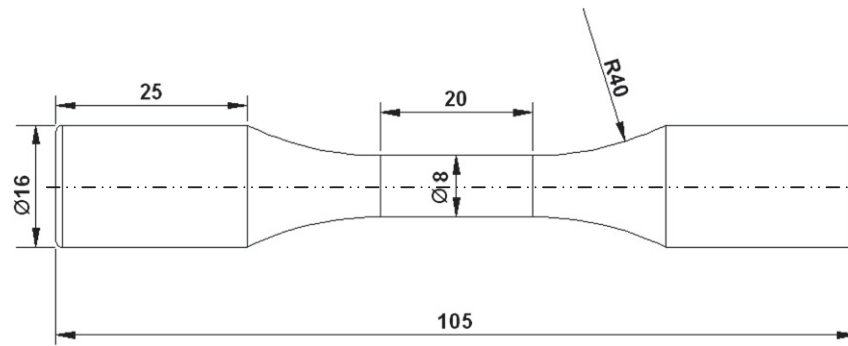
Fatigue specimen geometry (dimensions in mm).
